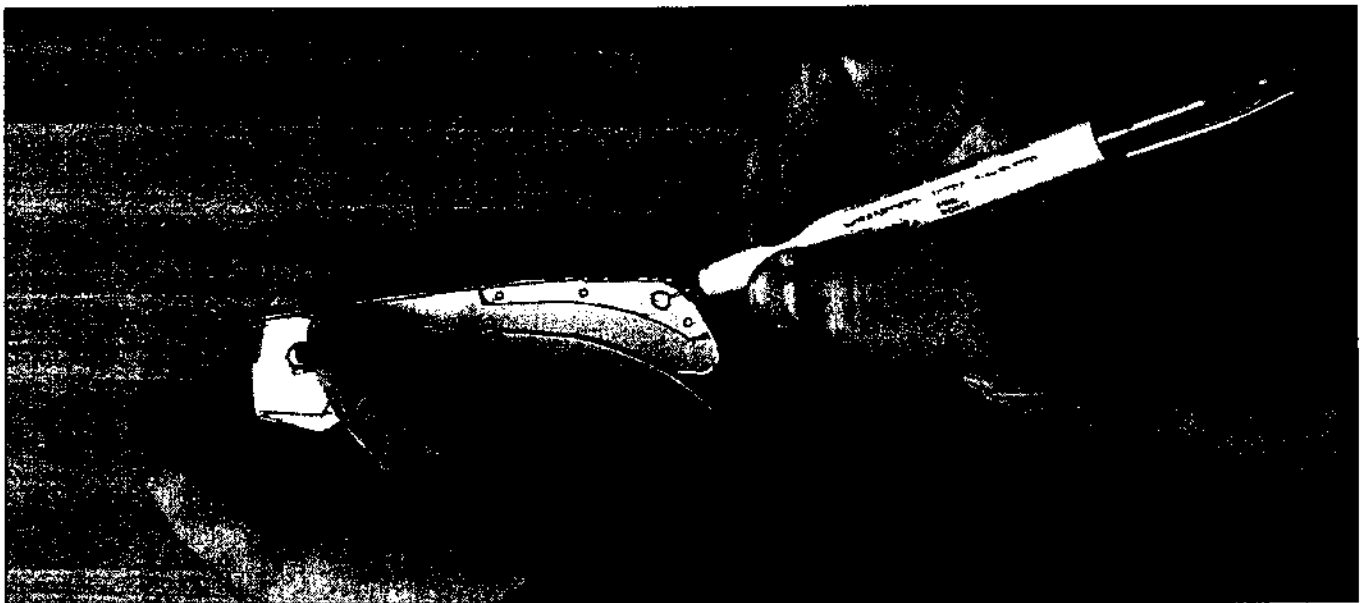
Pivot holes are drilled out and a try pin inserted through both parts so the blade can swing freely.
